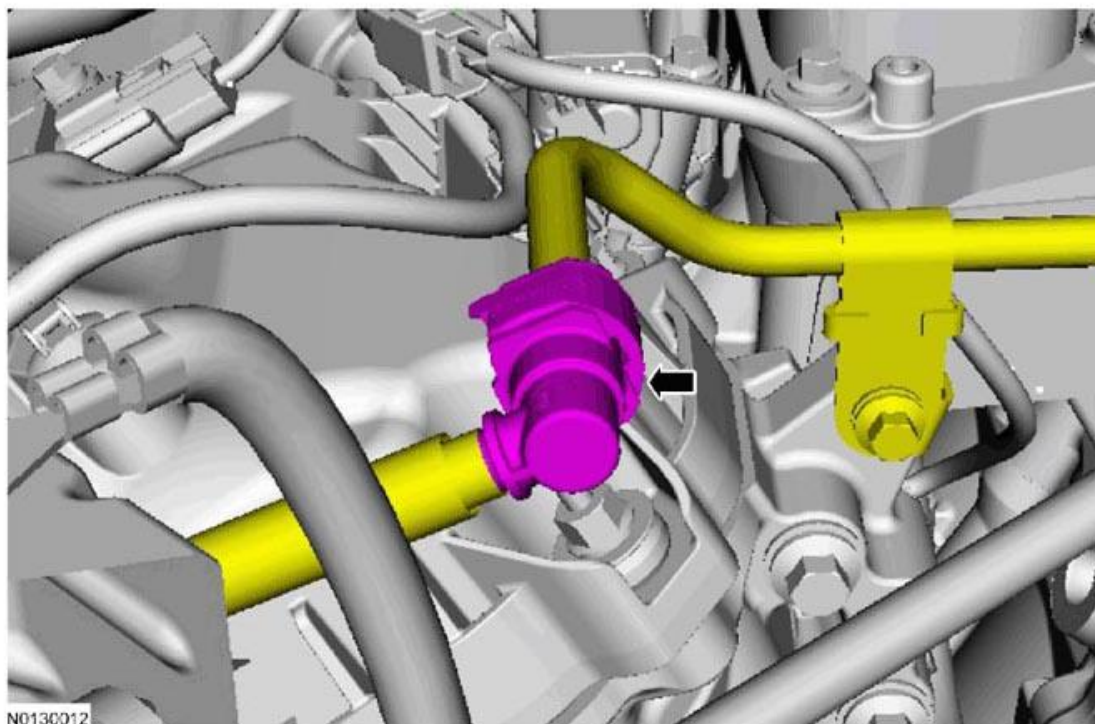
Locating High Pressure Fuel Tube Bracket Bolts
